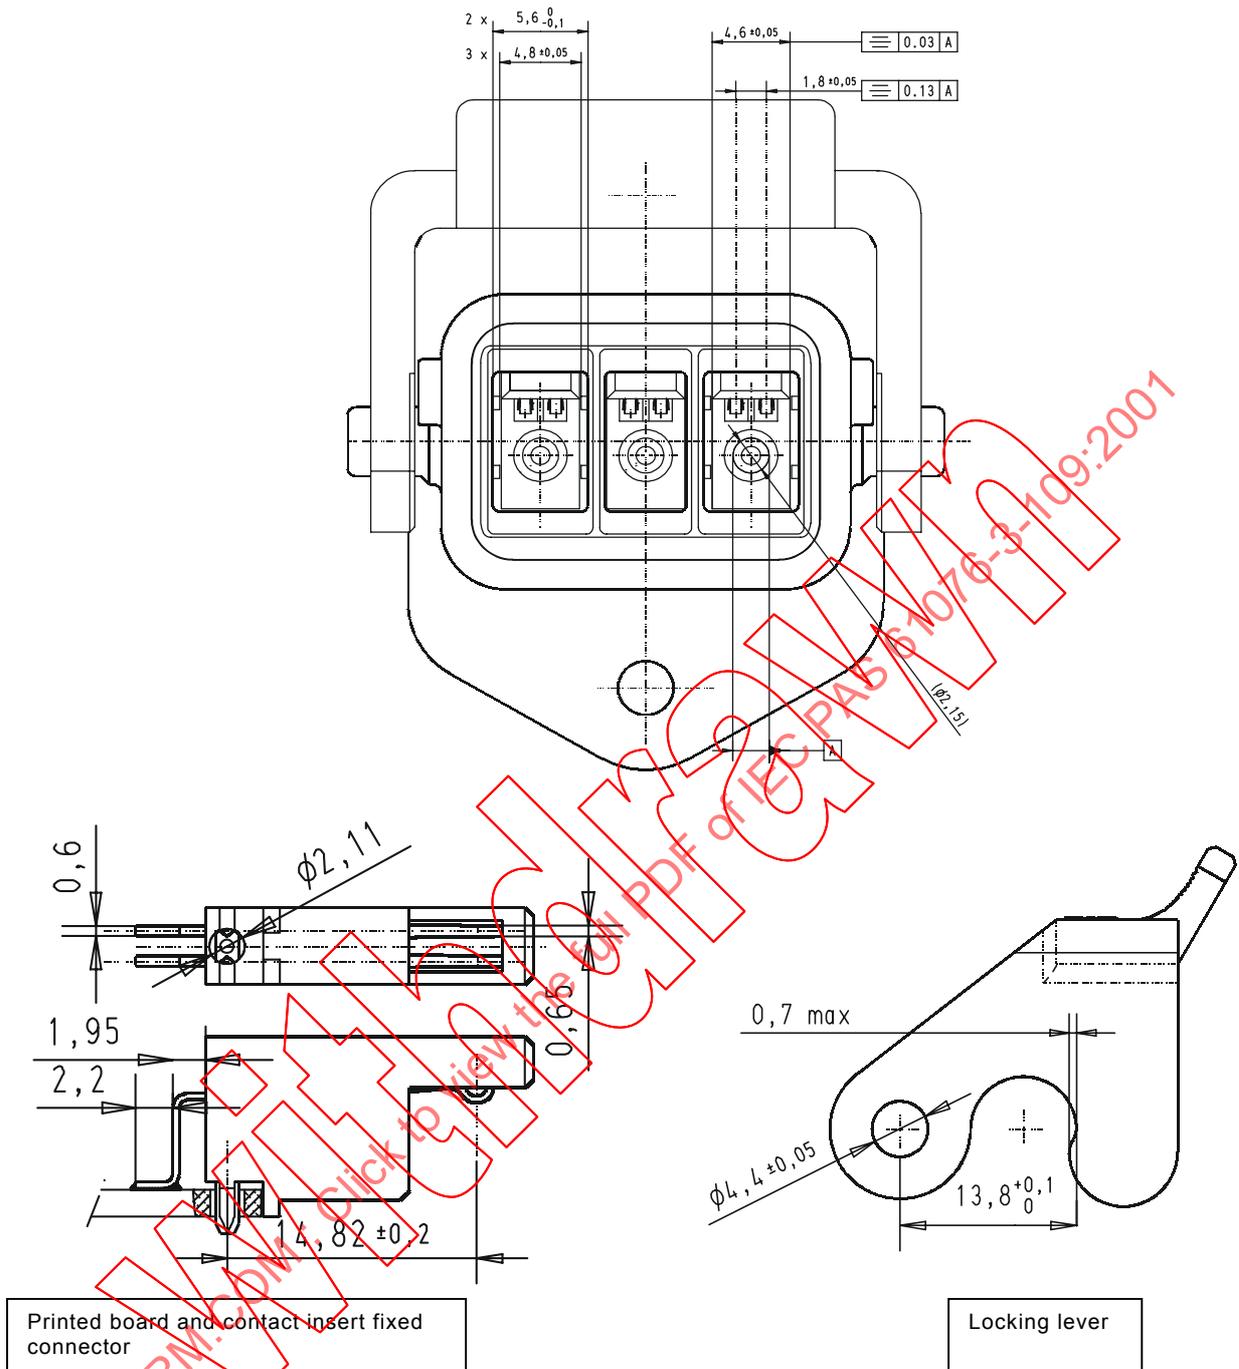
(cont.) – Fixed connector with housing, shielding, insulation body and contacts
